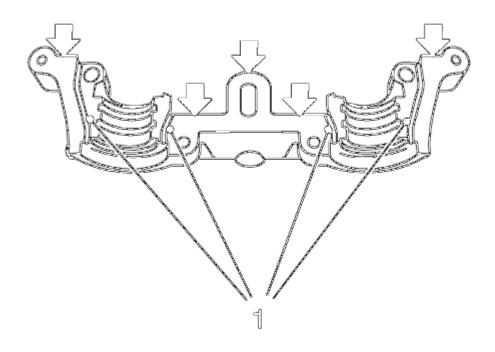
View Of Sealing Surfaces And Grooves Courtesy of GENERAL MOTORS COMPANY
